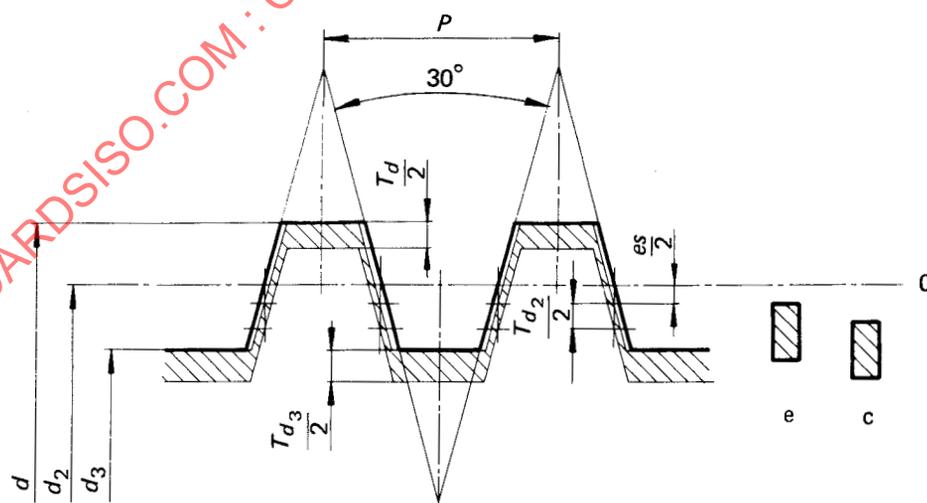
Bolt threads with tolerance positions c and e for the pitch diameter
